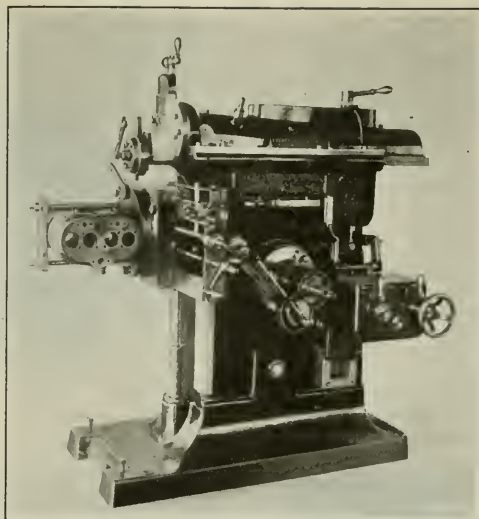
Using the Equipment shown in Fig. 1 for shaping a Side of the Cylinder Block
